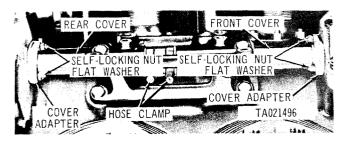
Disconnecting or connecting horizontal fan drive shaft front and rear cover adapters.
